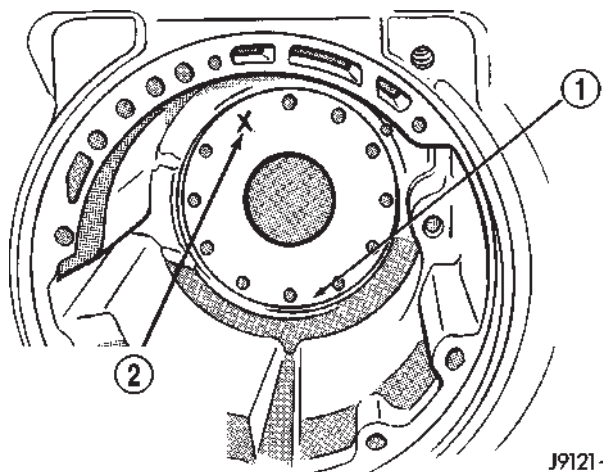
Location Of Blank Area In Clutch Cam Bolt Circle
